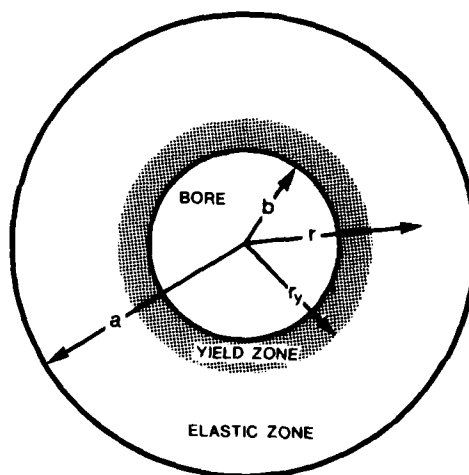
Dimensions of the barrel wall section at autofrettage;
